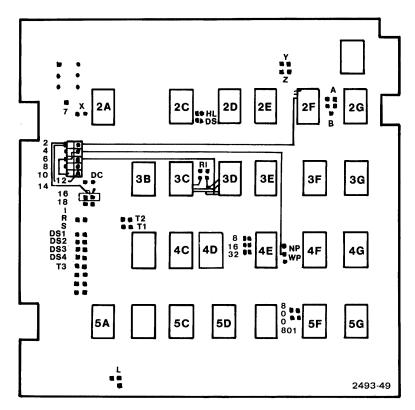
Wire Harness and Plug Location for Disc Drive with 118-0358-02 Board.
